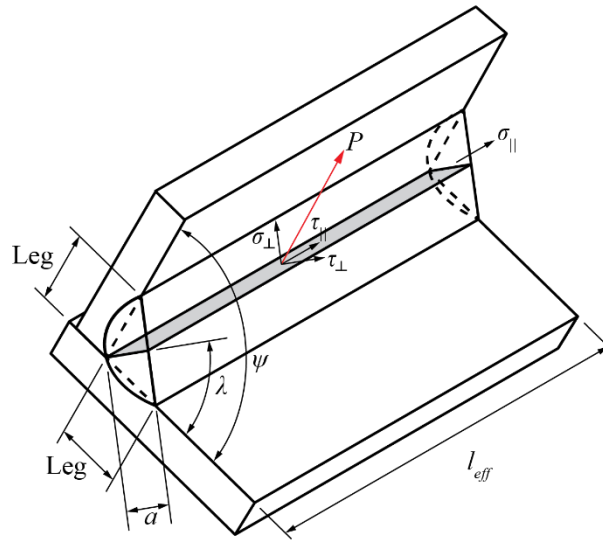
Stress components of a fillet weld for the directional method (Newcomb and Tousignant 2021)
